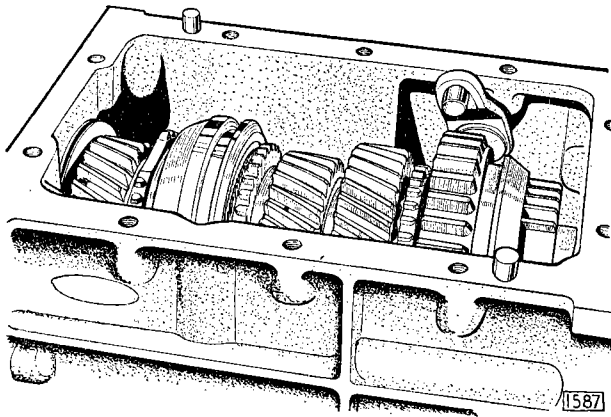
The top cover removed showing the layout of the mainshaft gears
